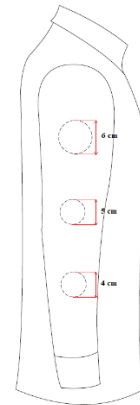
Technical drawing and opening dimensions of the shirt sleeve with manipulation technique (d)
